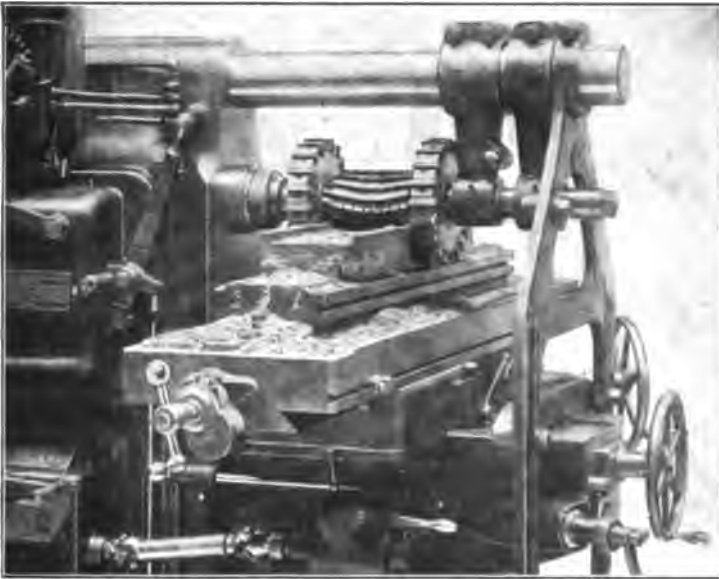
Milling Top and Sides of Casting with Gang Mill
